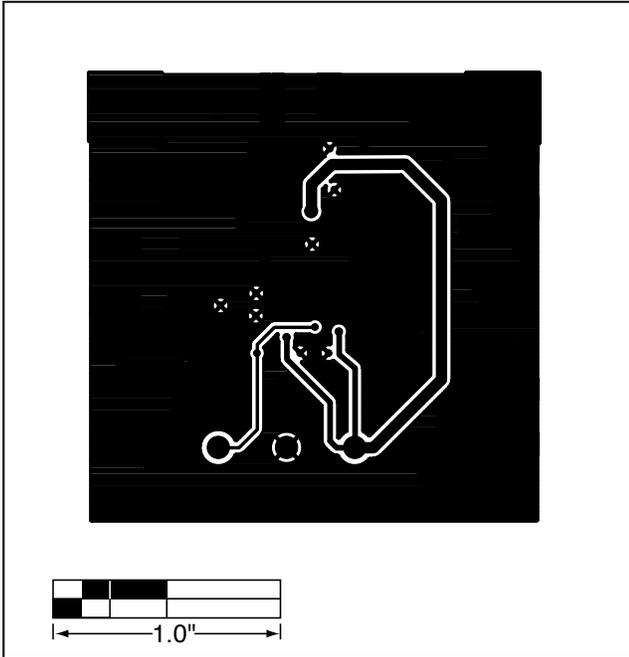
MAX9982 EV Kit PC Board Layout—Inner Layer 3 (Routes)
